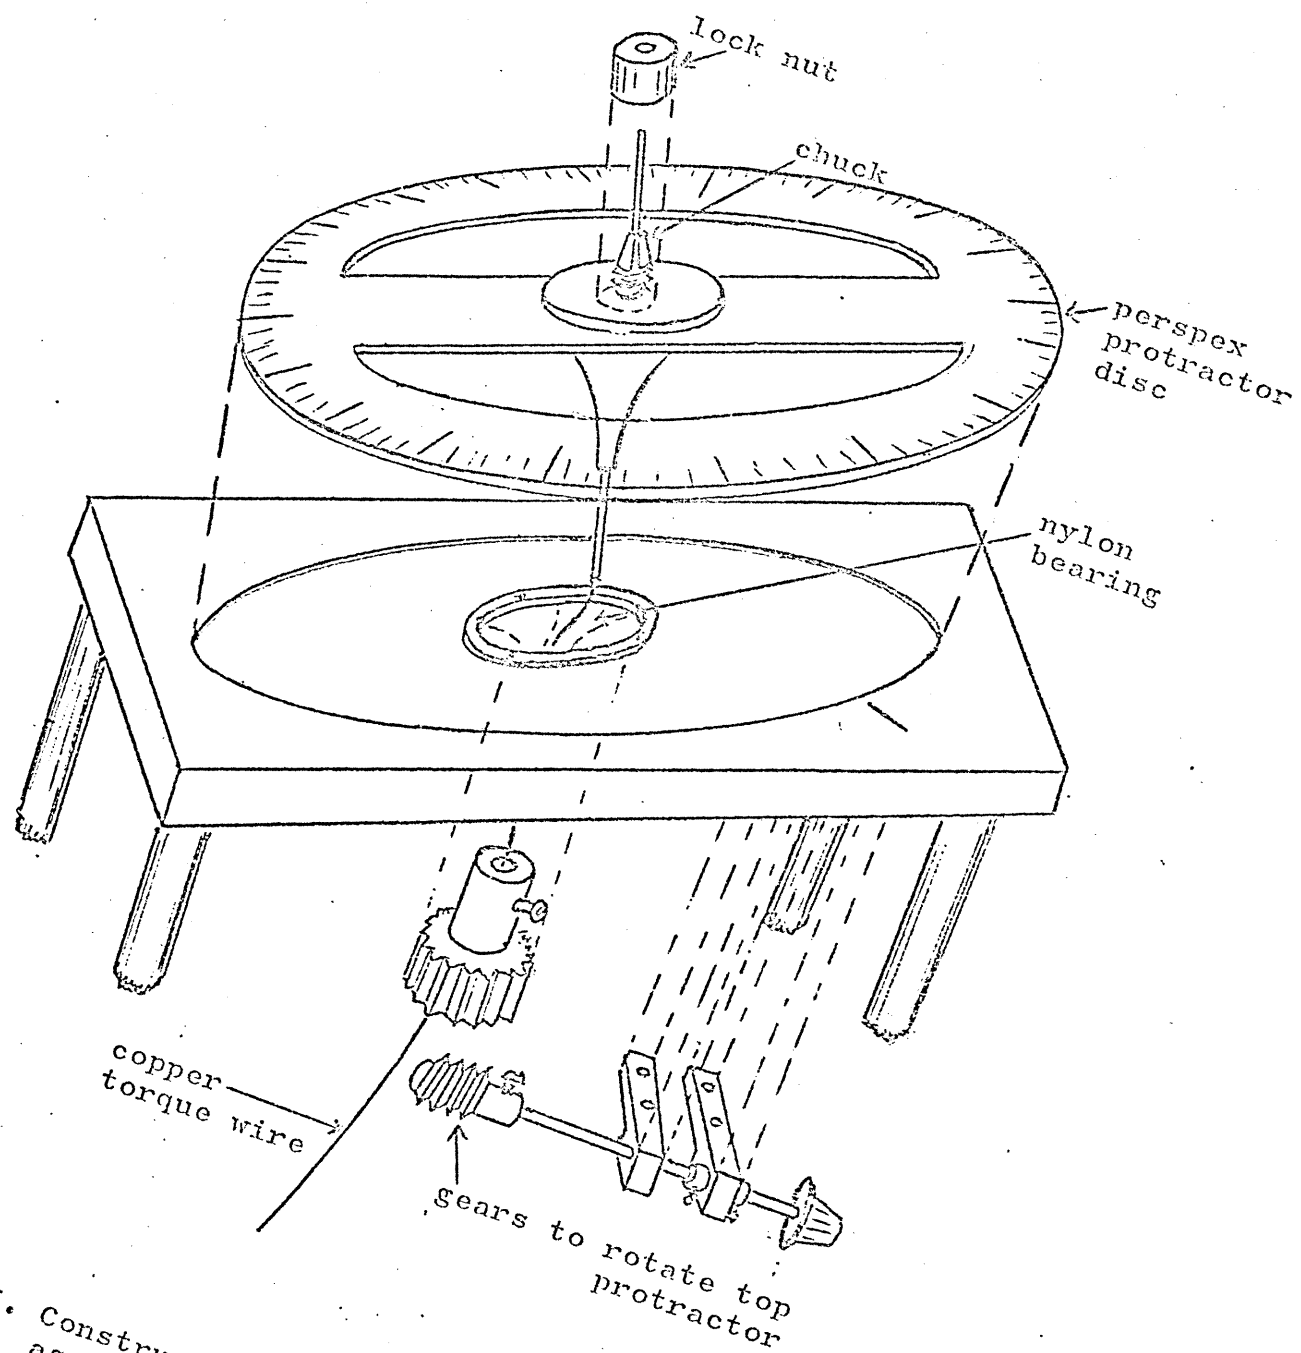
Constructional details of top protractor assembly of torque magnetometer.
